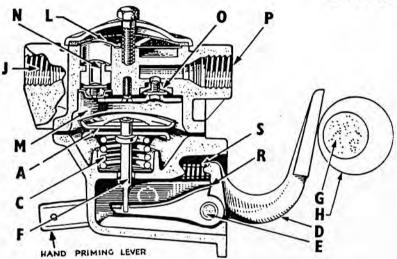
SECTION VIEW OF FUEL FEED PUMP
